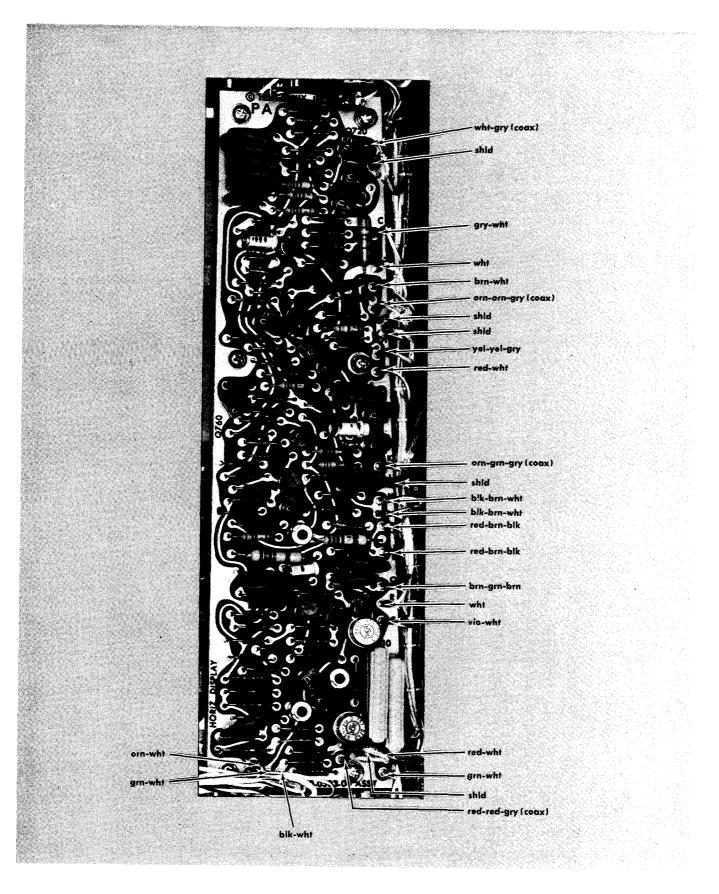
Horizontal Display circuit board assembly showing color code to pin connectors.
